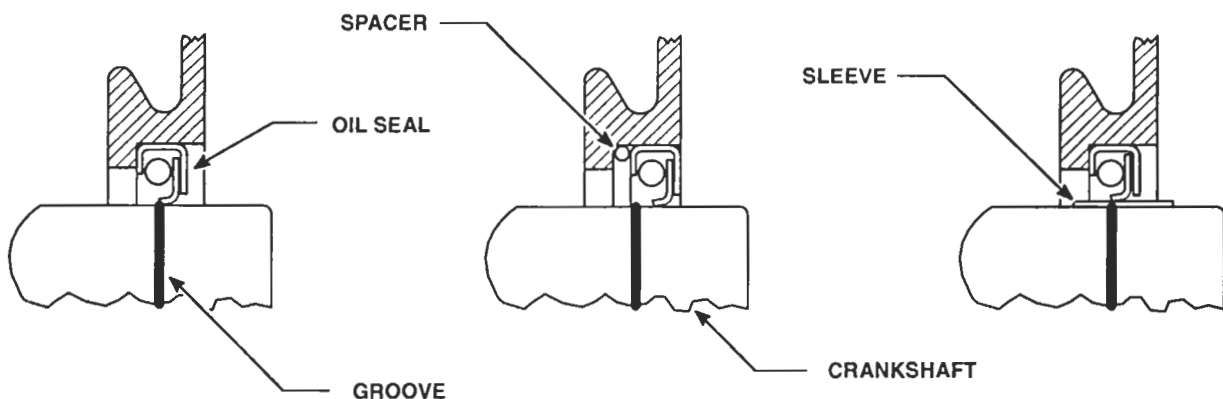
Rear Oil Seal Spacer or Sleeve on Grooved Crankshaft
